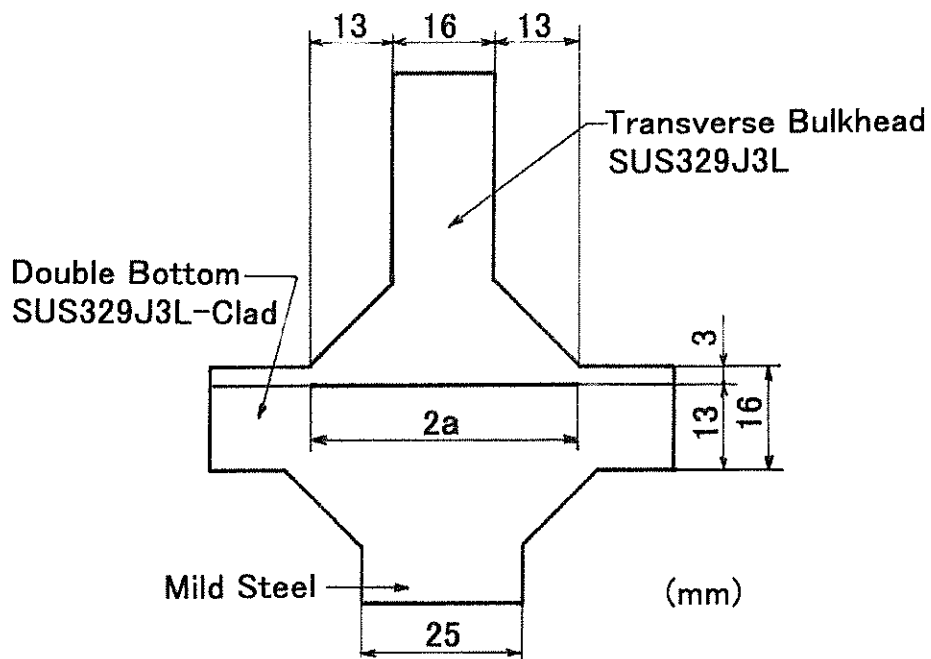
Cruciform welded joint between transverse bulkhead and double bottom
